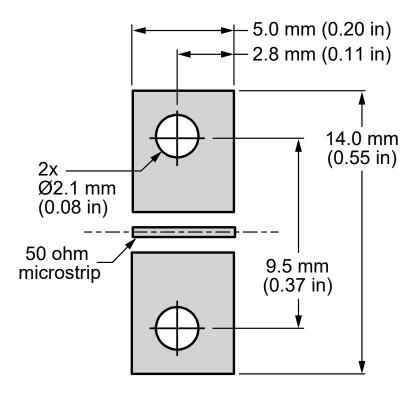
Recommended PCB Dimensions for the CON292003-1-G
